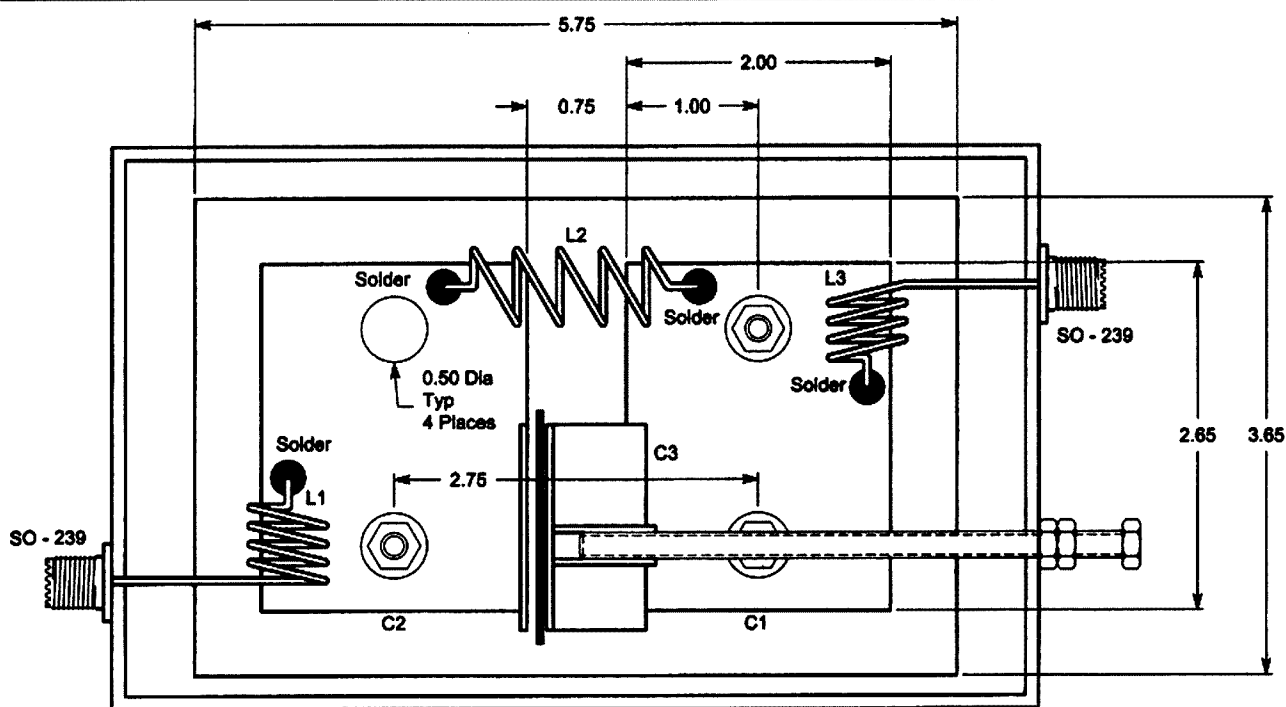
Assembly Drawing for Filter. All dimensions in inches
